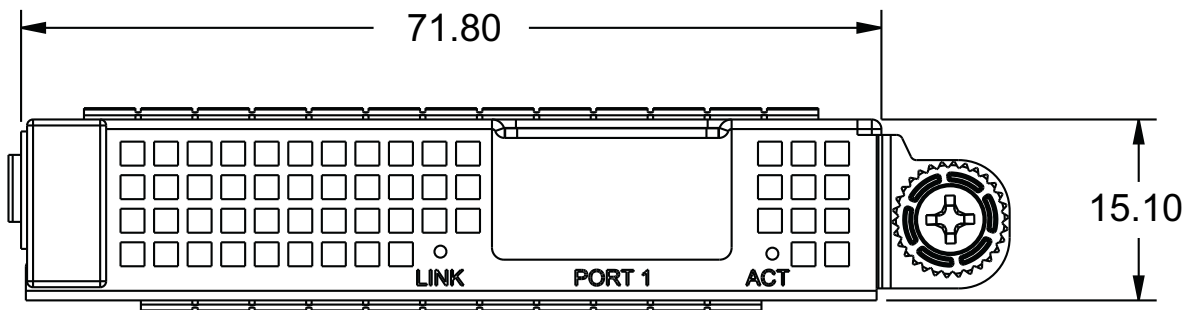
Dual-Port OCP Adapter Physical Dimensions (in millimeters)
